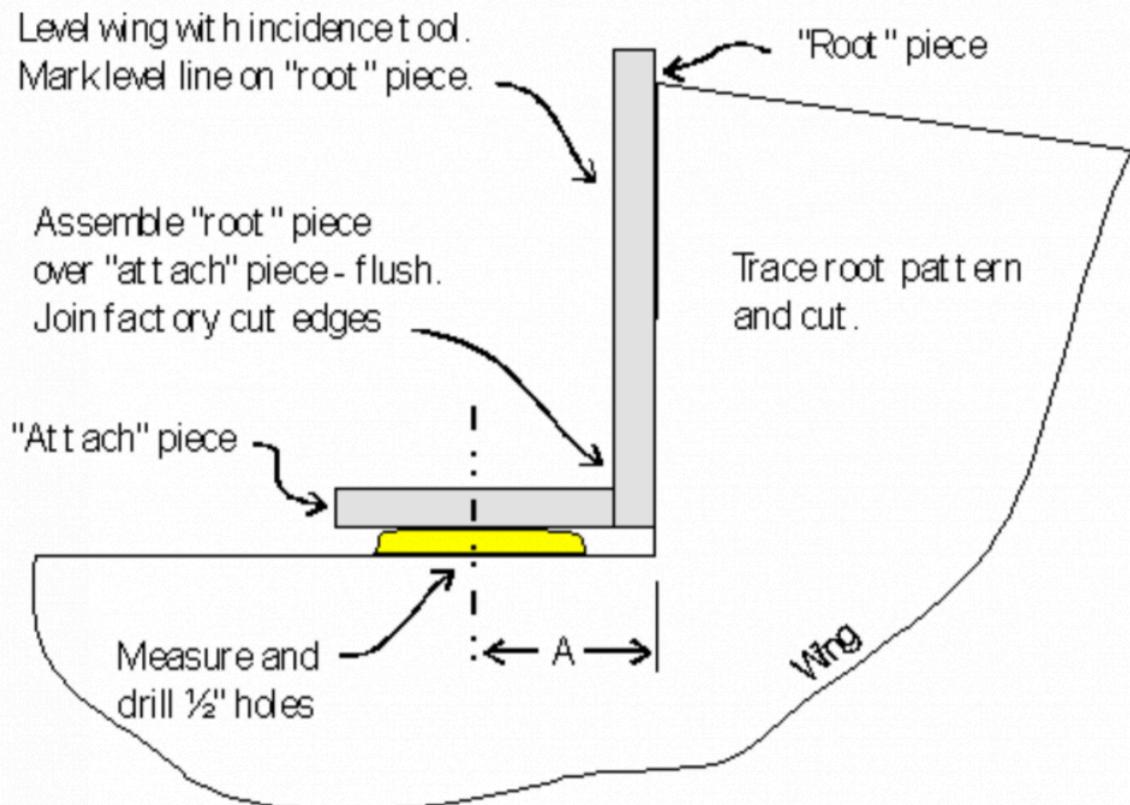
Transfer Template Construction - Tracing Wing Root
